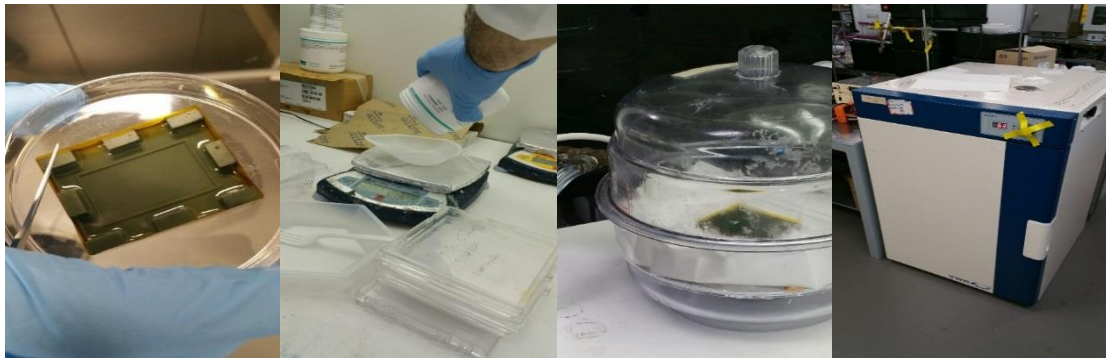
Fabricated mold → PDMS forming → Degassing → Baking
